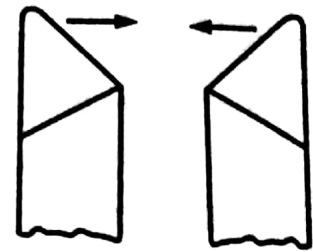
Left Hand and Right Hand Turning Tools
